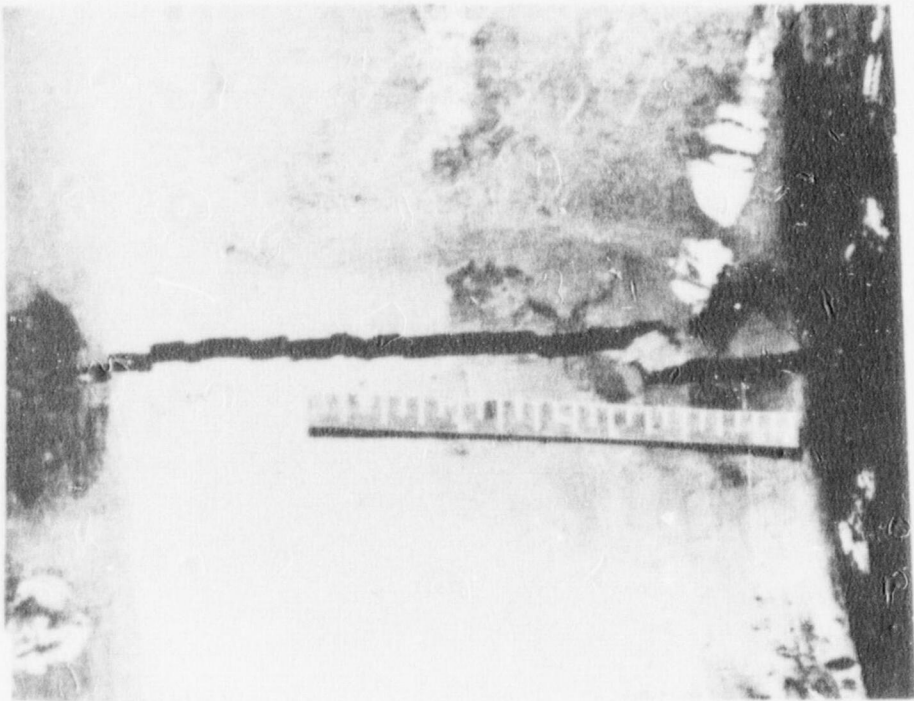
VIEW OF FATIGUE CRACK ON THE INSIDE
